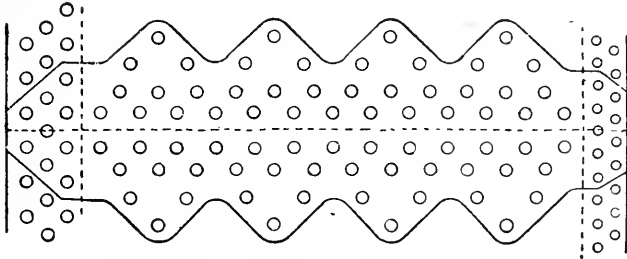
Special 9-Rivet Quadruple Joint.
